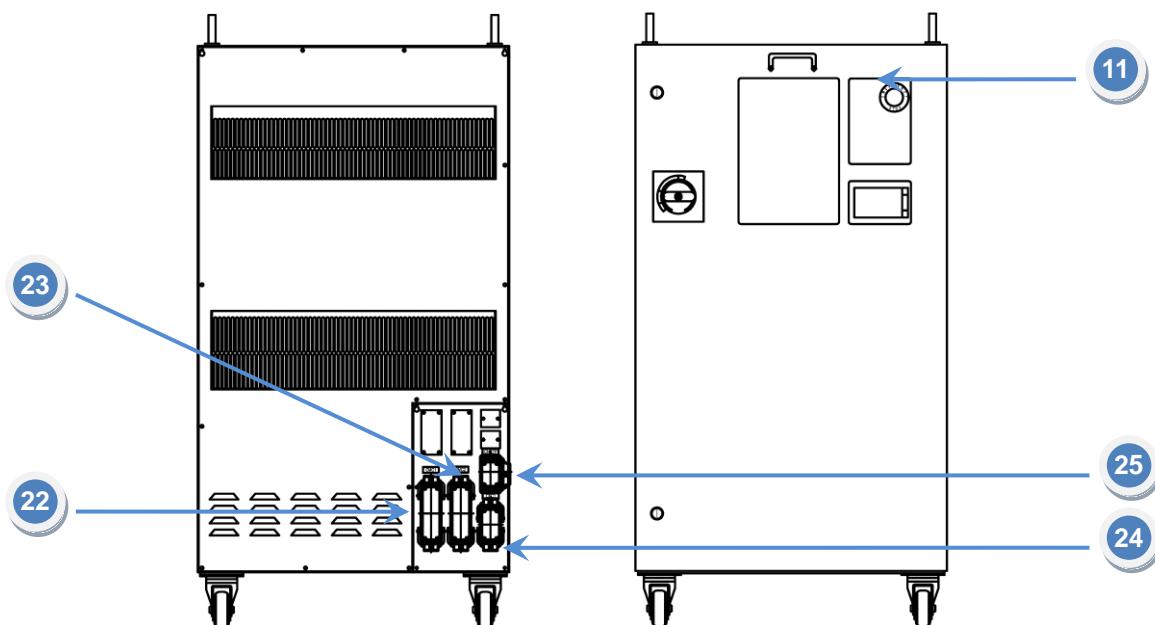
Hi5-N00 Part arrangement parts in the exterior of a controller
